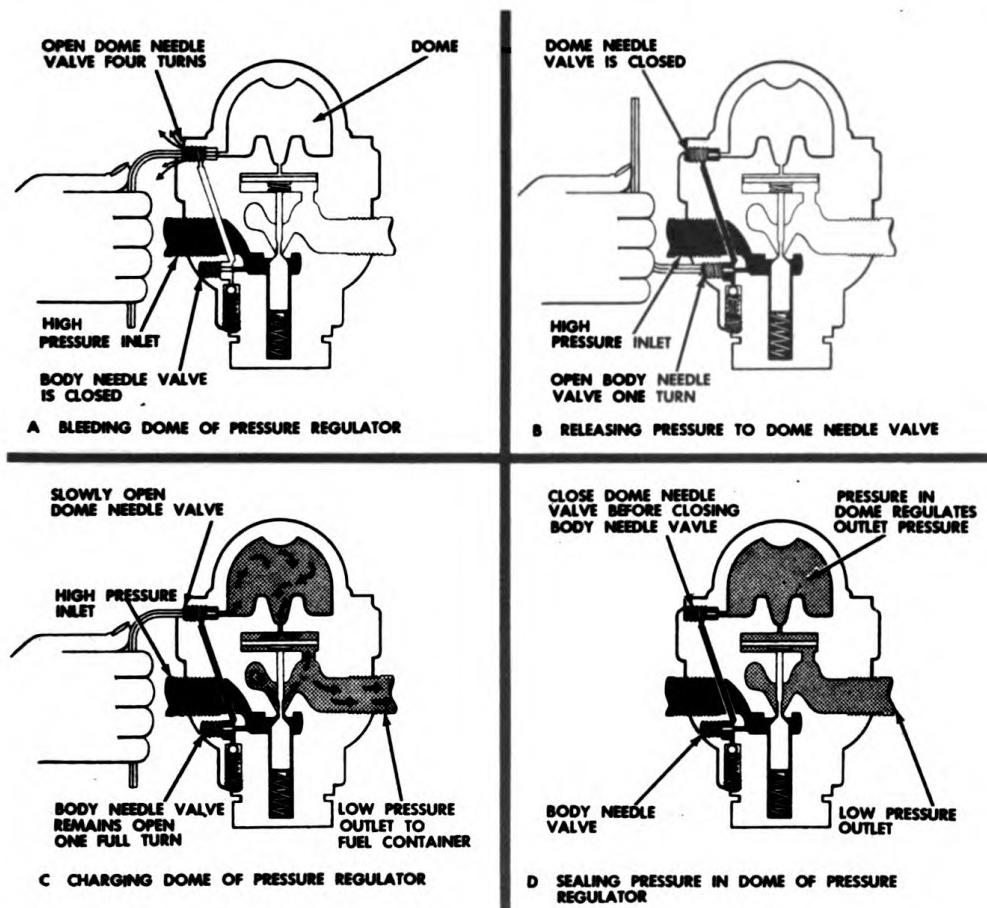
Diagrammatic sketch showing adjustment of pressure regulator.
